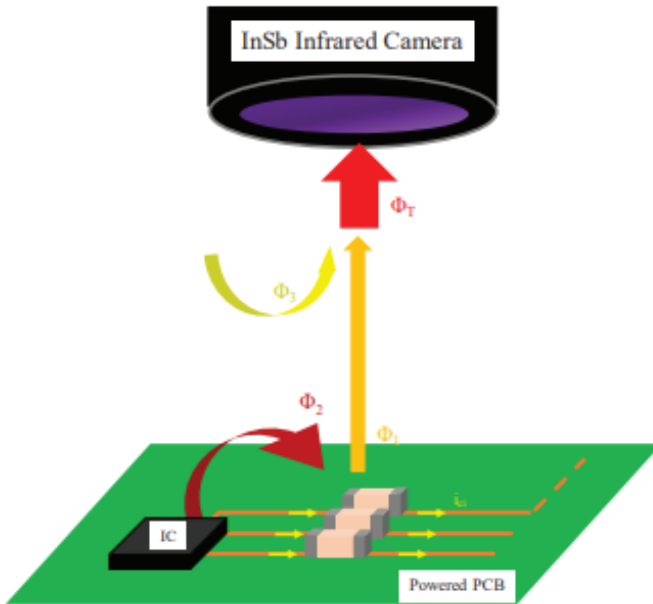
Infrared Technology for Enhanced PCB Inspection
